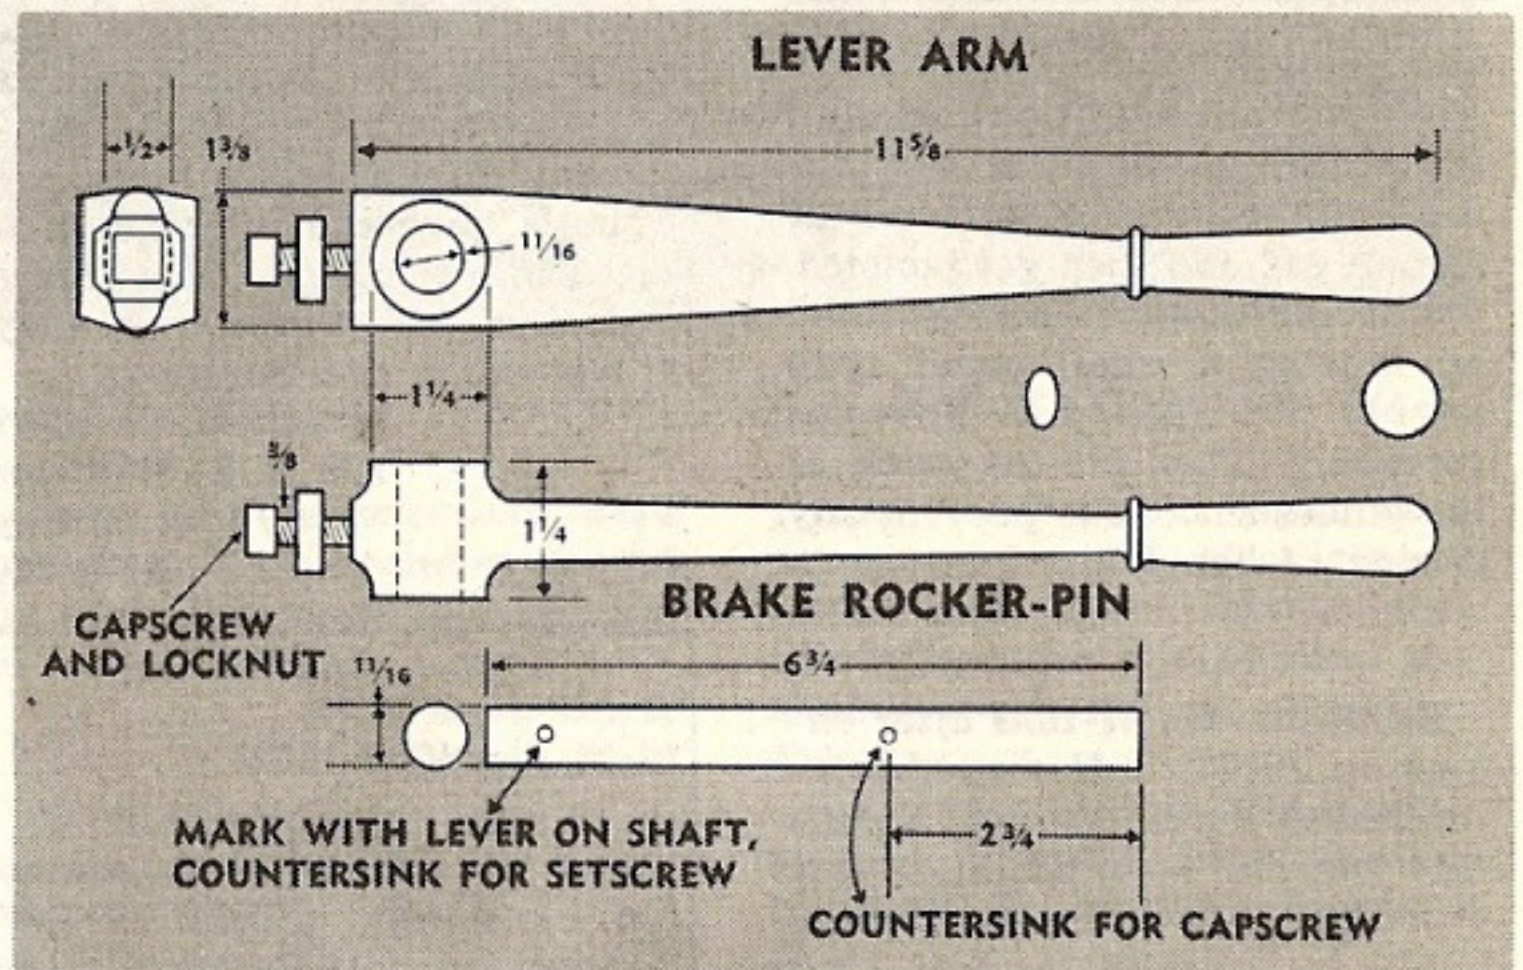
Use an old front-wheel-drive lever and a piece of round stock for the arm and the longer guide pin.
